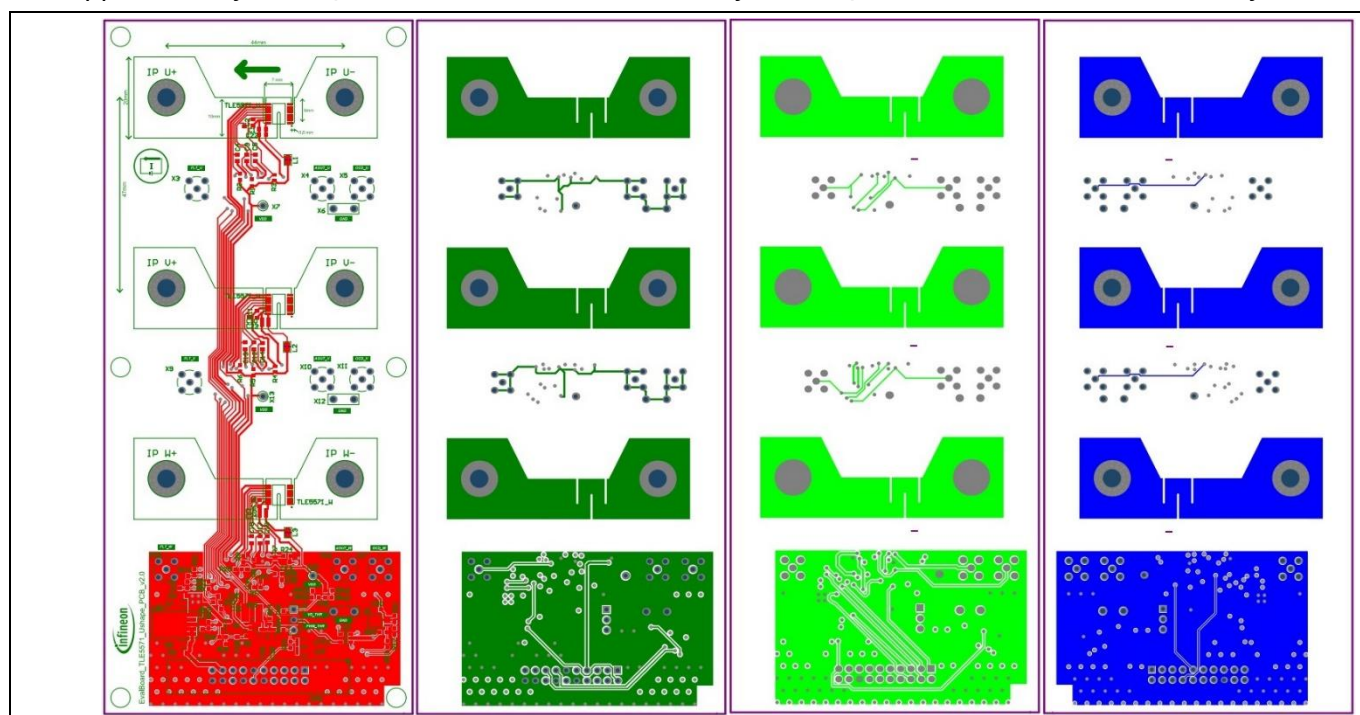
XENSIV™ TLE5571 evaluation board PCB layout
